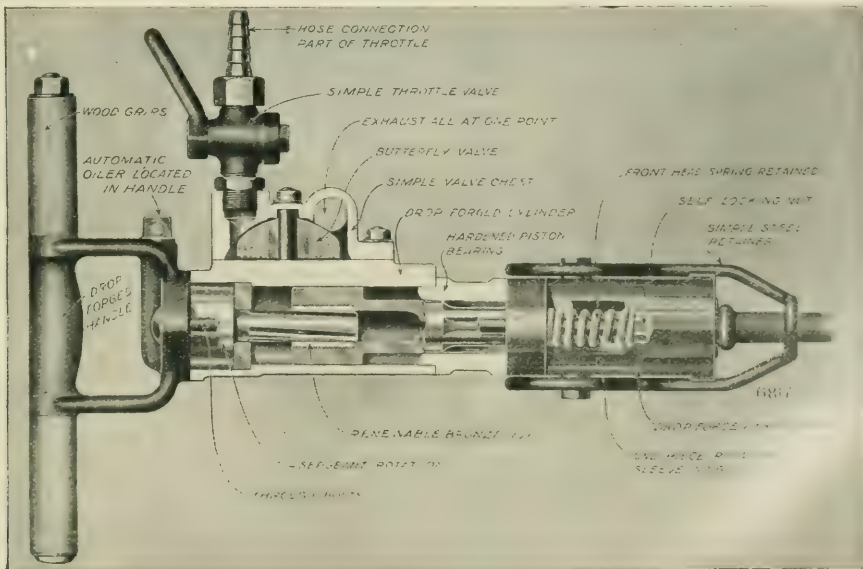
THE INGERSOLL-RAND JACKHAMMER DRILL.
